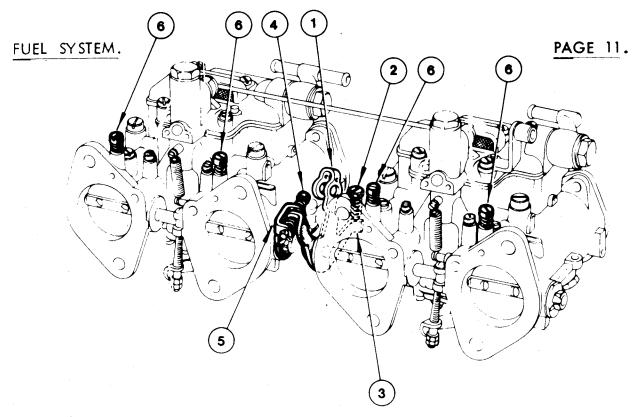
CARBURETTER ADJUSTING SCREWS.
